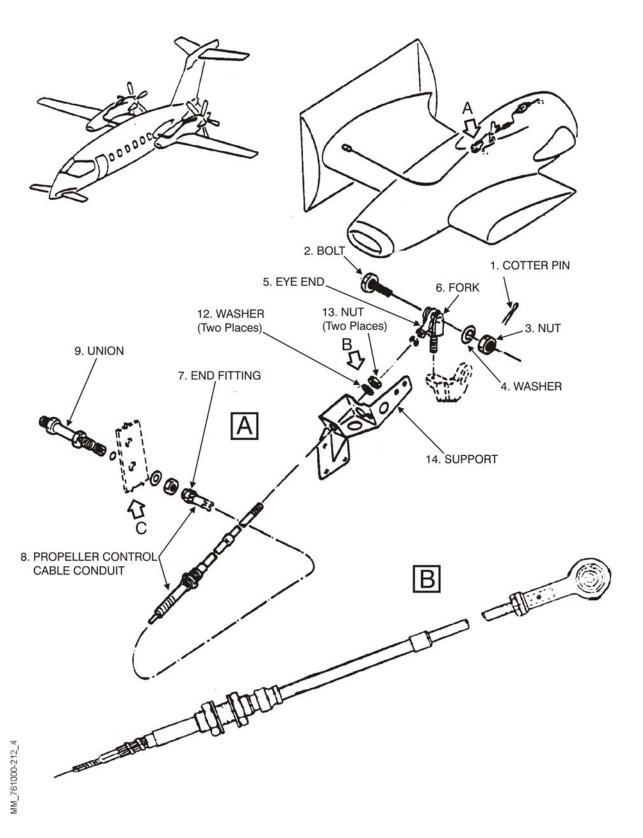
Power/Propeller Control Cables (Fuselage-Engine) - Removal/Installation (Sheet 4 of 4)
